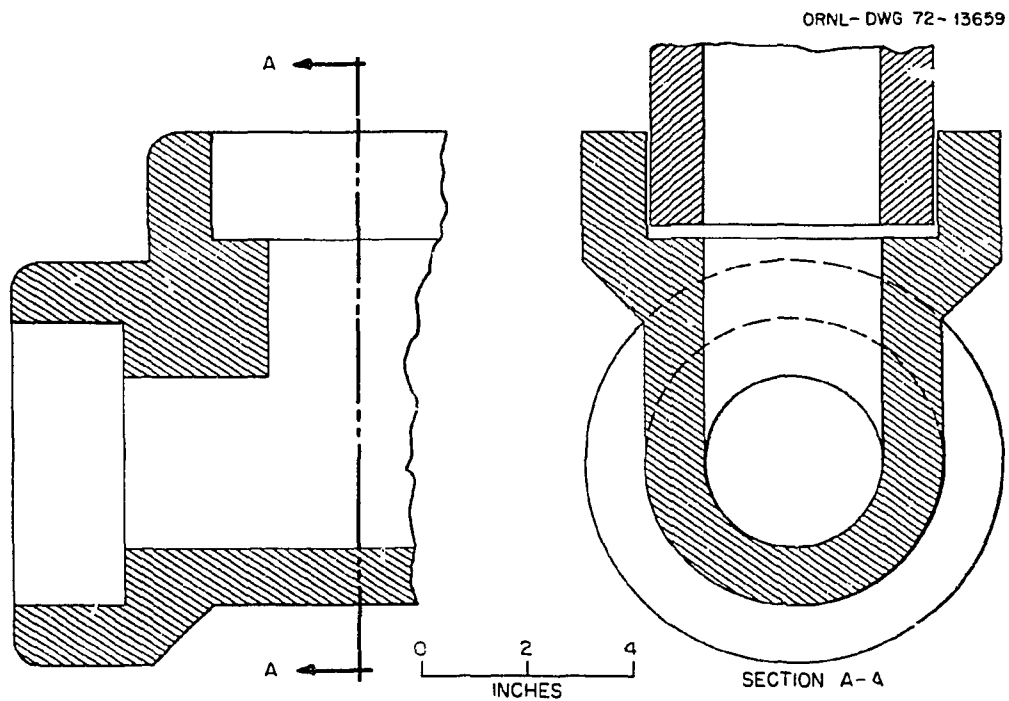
ANSI B16.11 tee, 1-in., 6000-lb-class, sched-160 pipe.
